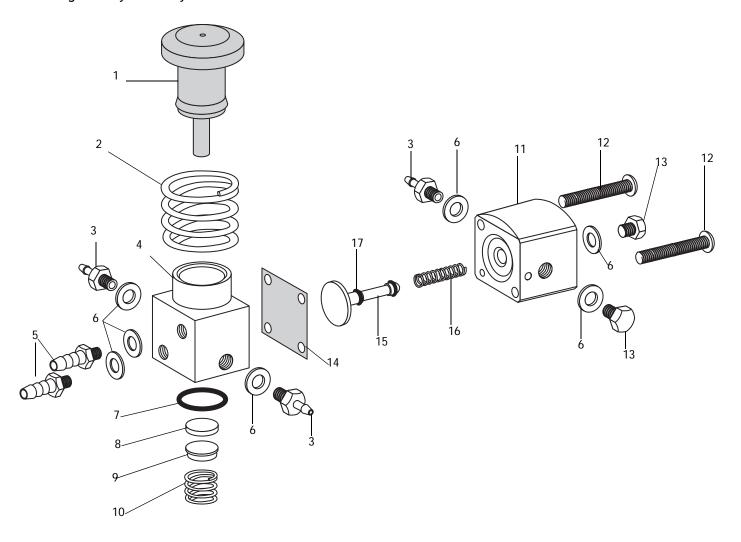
Foot Control Accessory Button and Wet/Dry Toggle Valve
